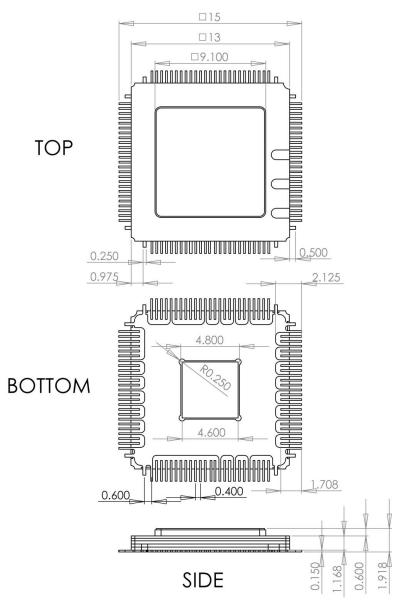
CQFP 100-Pin Package Drawing (All Dimensions in mm)
